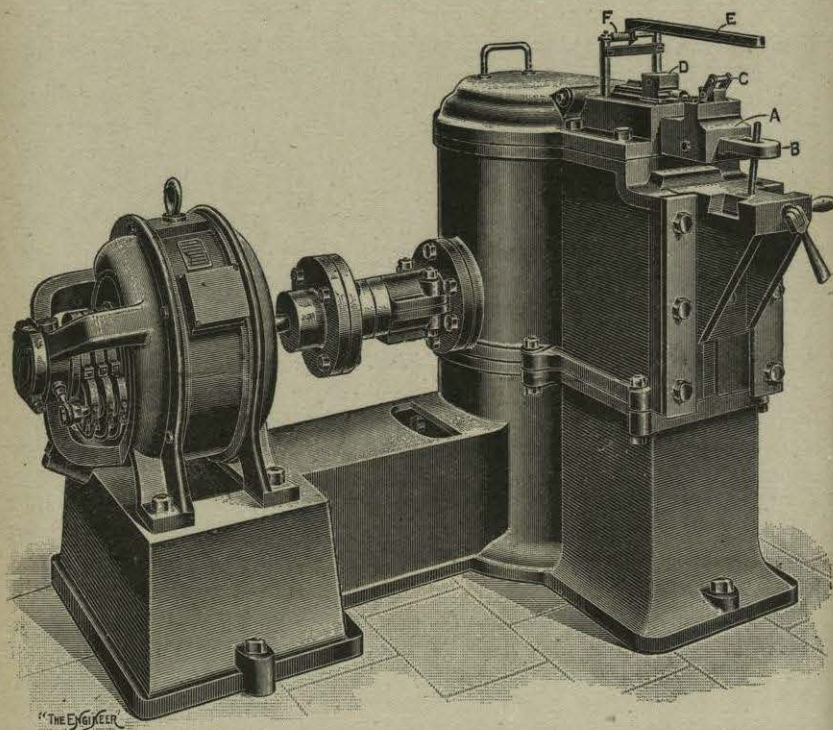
Arnold Alternating Test Machine, with Motor.—A, Ram; B, sliding plate; C, catch; D, speed counter. The bar E is attached to the test piece by a wire (not shown in the illustration), and when the test piece breaks the counting automatically stops.
